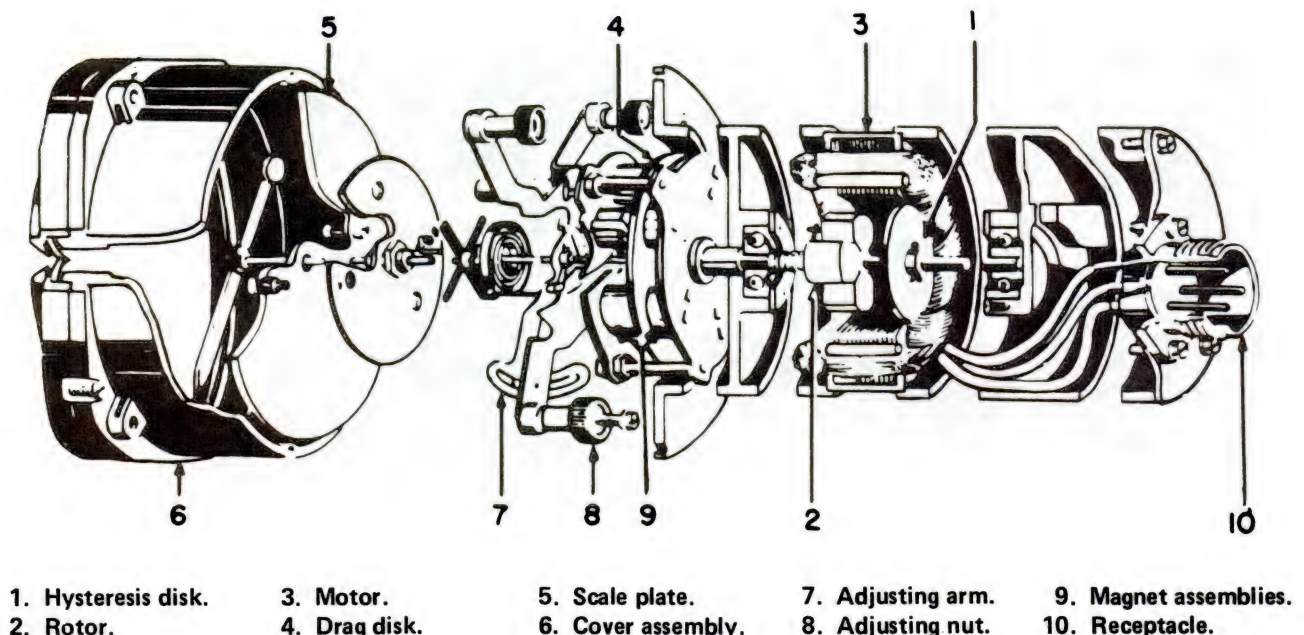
Cutaway view of a tachometer indicator (radial).
